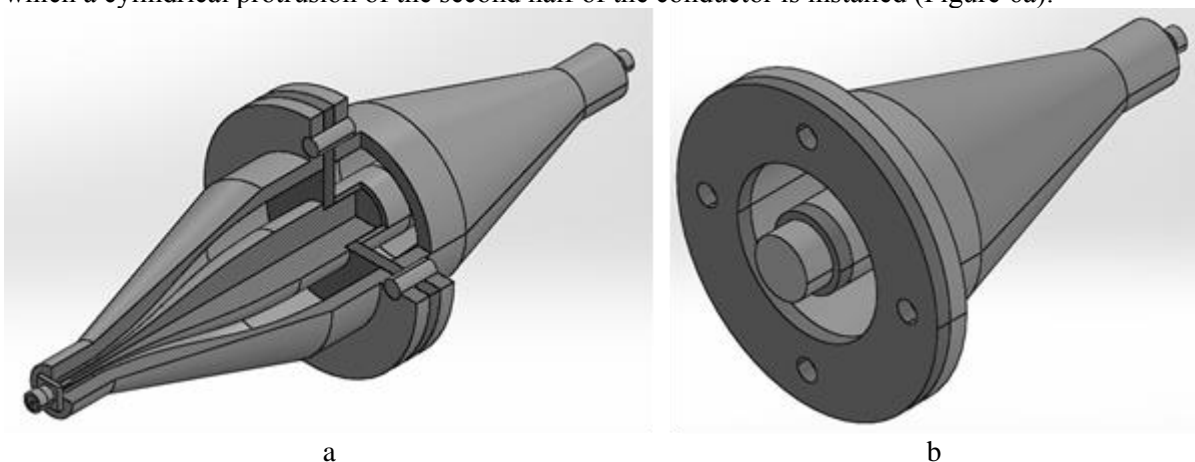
Isometric view of the improved coaxial cell (a) and the shape of the reference sample (b).
